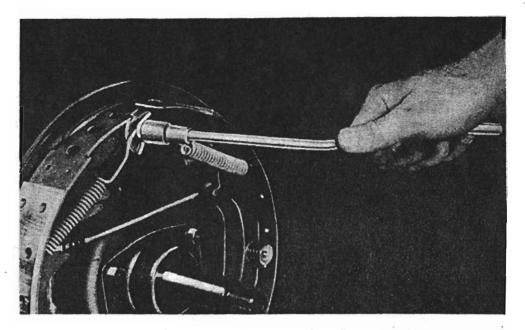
Use the Wrench KMO-526 to Remove the Brake Shoe Retracting Springs.
